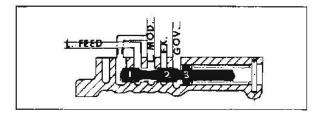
B-18 Modulator Limit Valve - Wide Open Throttle
